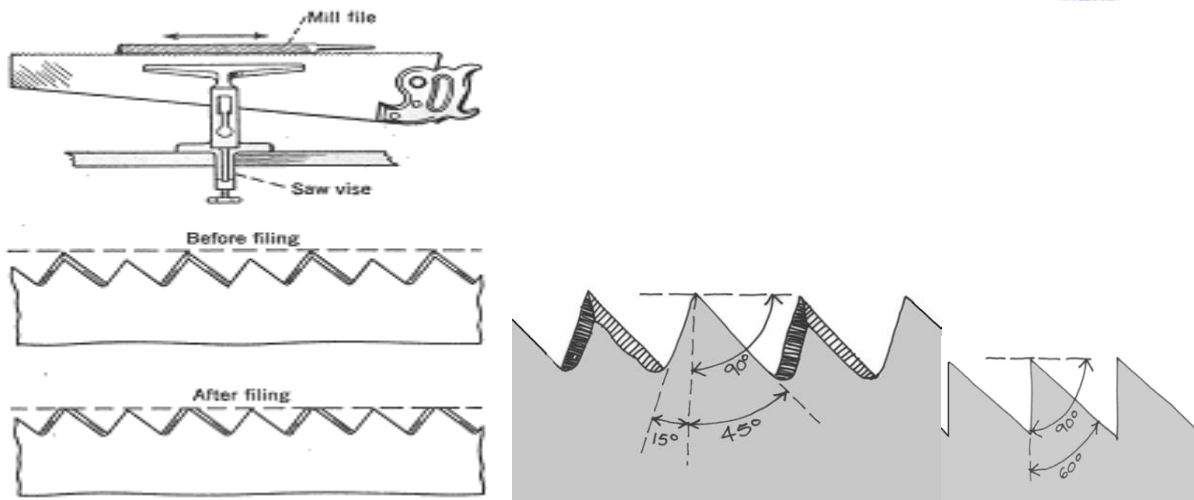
Jointing of hand saw Rip saw Cross cut saw
